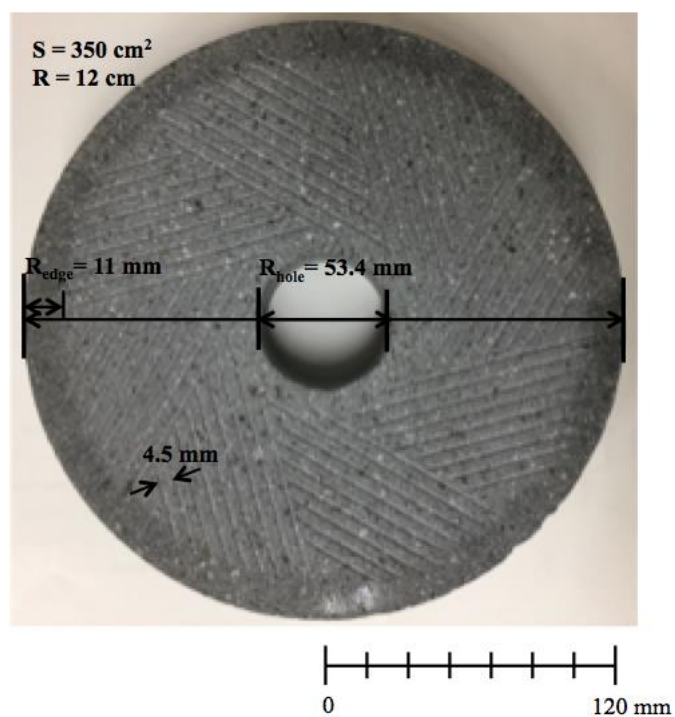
The lower millstone of the Mill with contact surface area of 350 cm^2 , millstone radius of 12 cm, edge distance of 11 mm, and groove width of 4.5 mm. The upper millstone is the same as the lower millstone.
